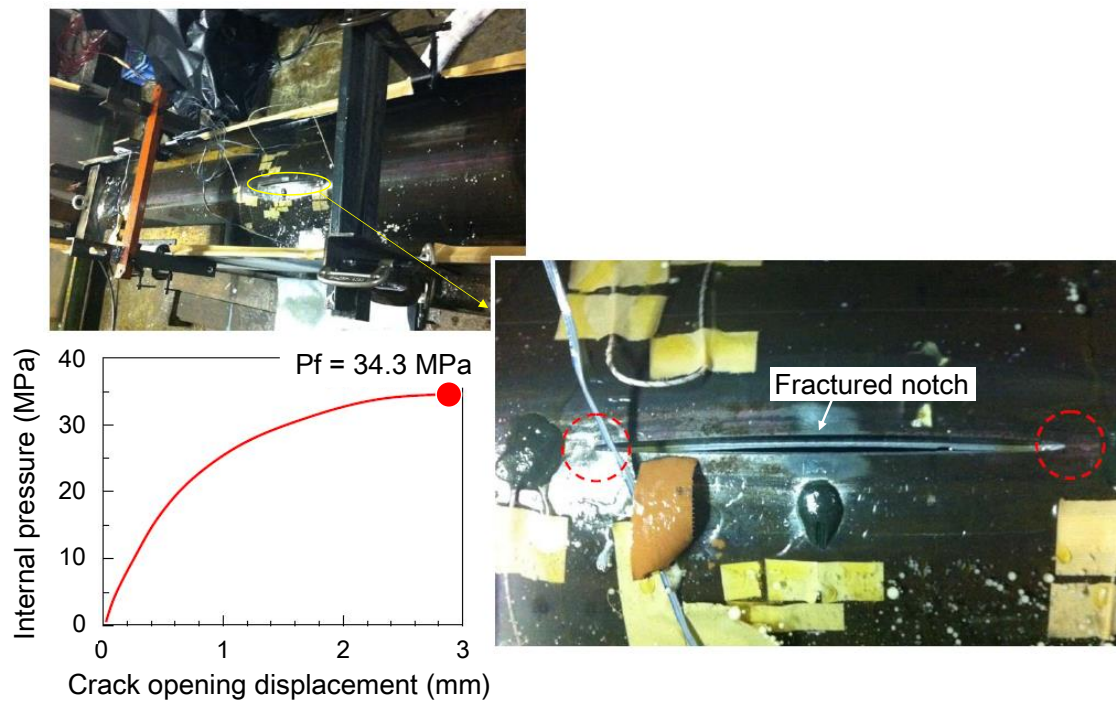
Fracture appearance of tested pipe in weld seam with notch
